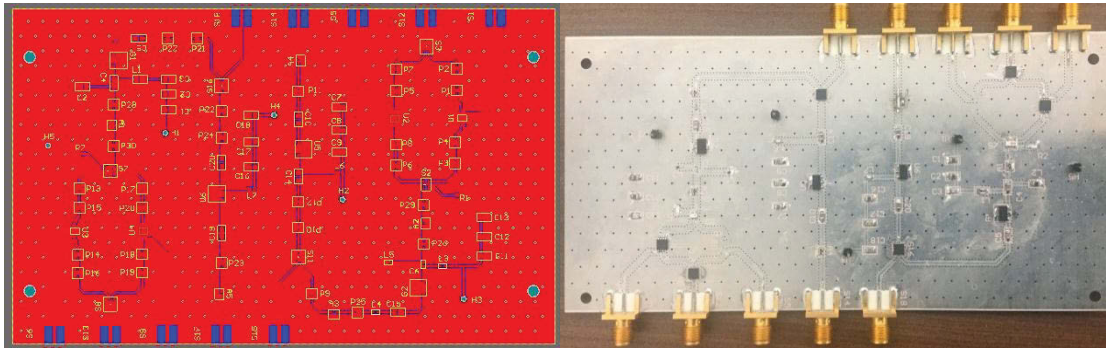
(a) Layout of transceiver board; (b) fabricated transceiver board.
